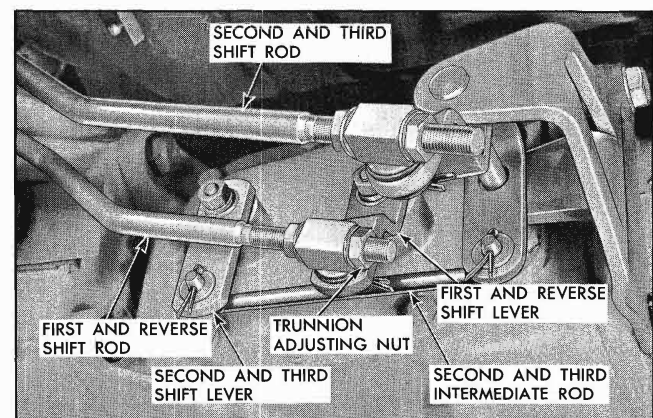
A-22 Proper Assembly of Shift Rods to Shift Levers
